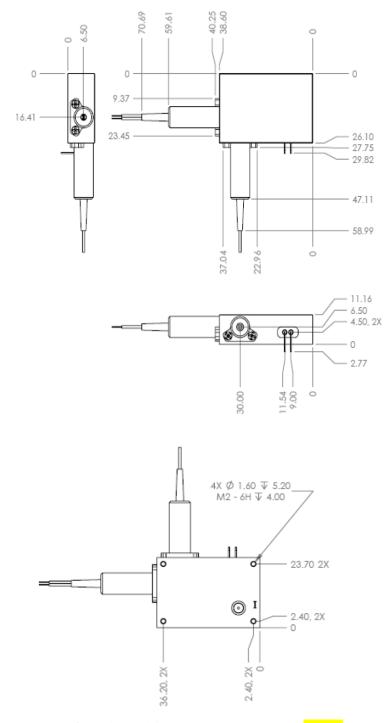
, Mechanical drawing of 10G DPSK DLI, Type-N
